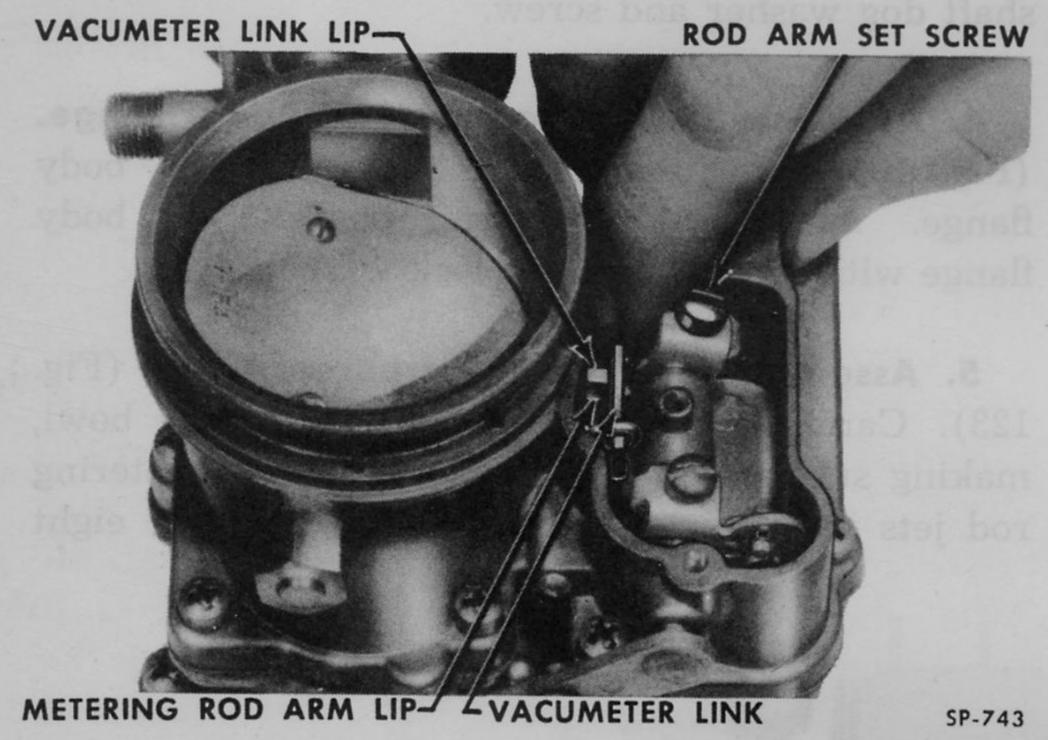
Carburetor Metering Rod Adjustment (WGD-7815 and 8135)
